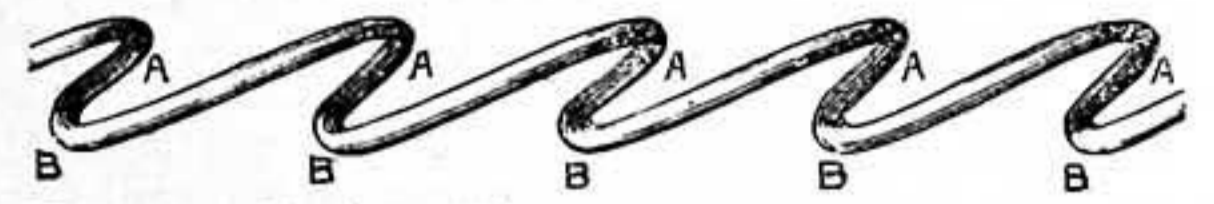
Lacing Wire in Fig. 51, with thick Wires removed.
